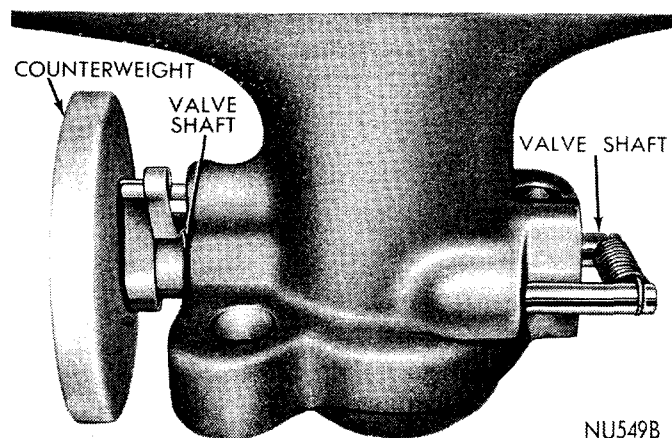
Manifold Heat Control Valve (318, 360, 400 and 440 Cubic Inch Engines Typical)
